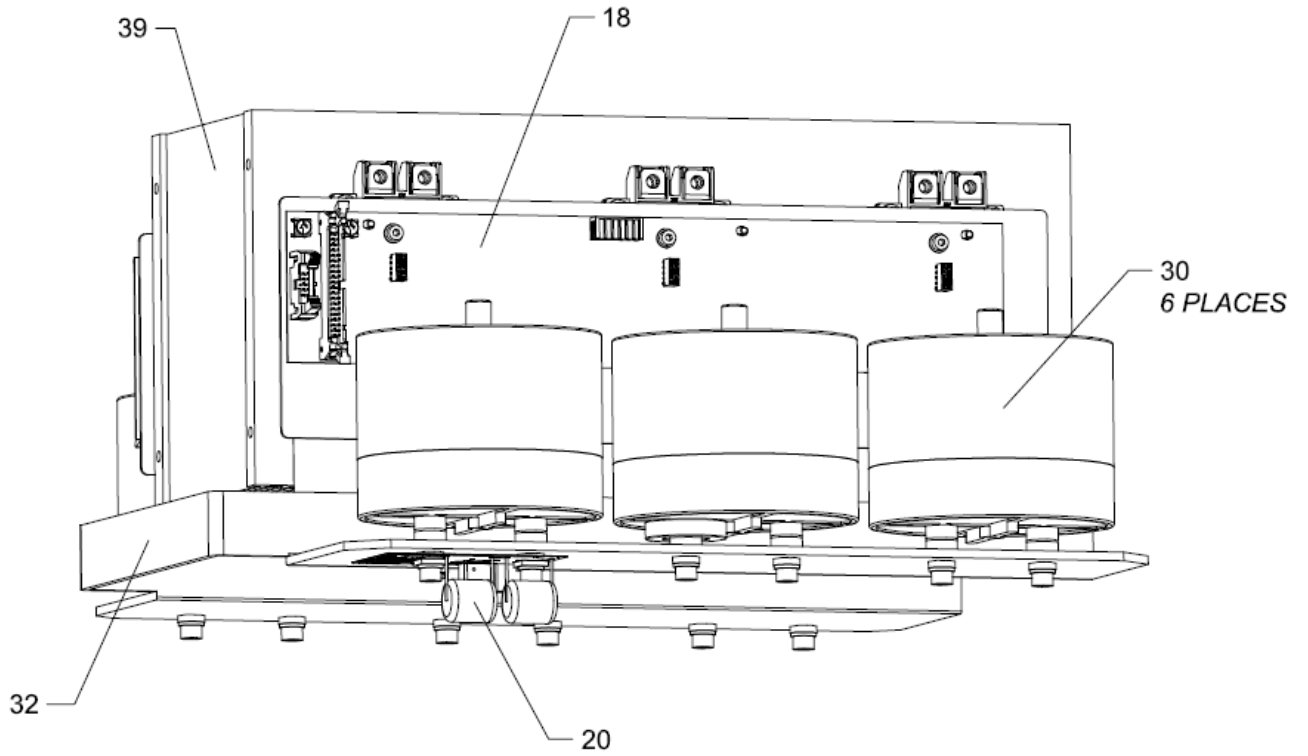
2500+ GPU Illustrated Parts List, Power Brick
